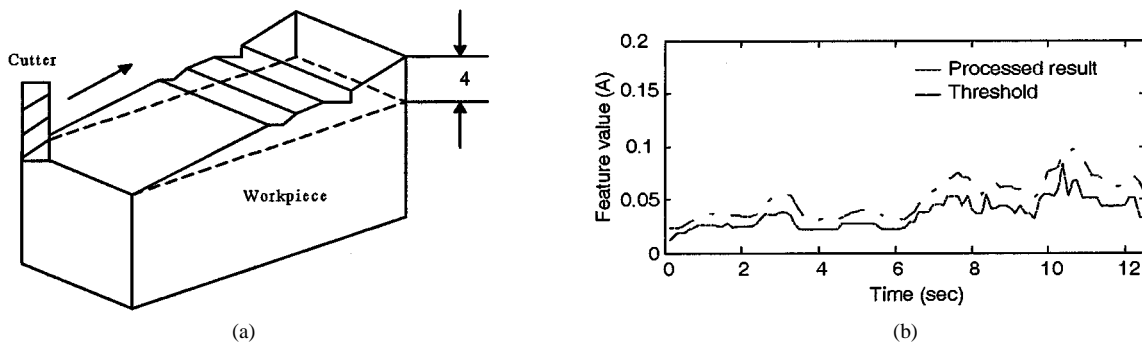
Feed-motor current signals when cutting irregular workpiece. Tool/workpiece material: HSS/45# steel; spindle speed: 900 rpm; radial depth of cut: 4 mm; axial depth of cut: 0–4 mm; feed speed of cut: 120 mm/min; cutter diameter: 6 mm; cutter flute: 4. (a) Workpiece. (b) The processed results of the feed-motor current.
